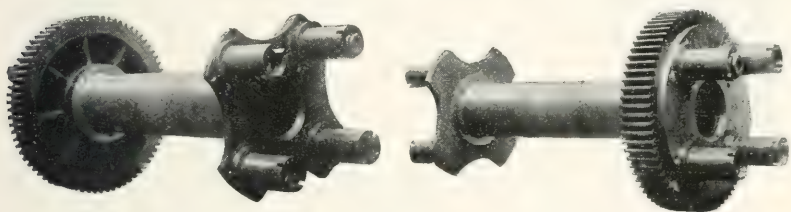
TWO VIEWS OF MOTOR QUILL USED WITH FLEXIBLE DRIVE ON EXPRESS CAR AND FREIGHT LOCOMOTIVE
